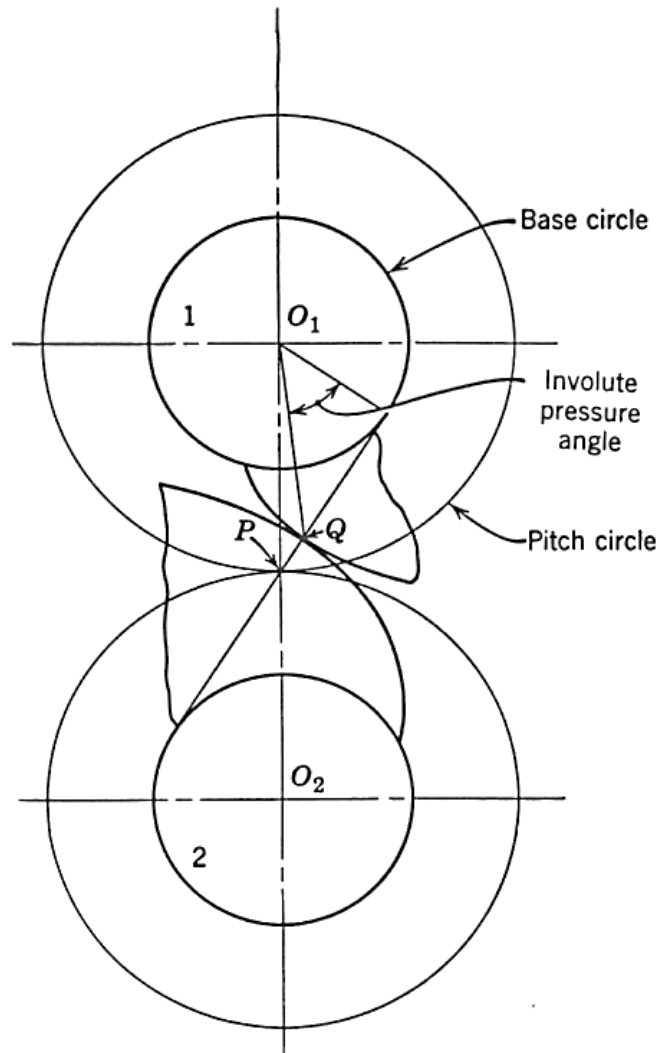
Base dimensions of a gear assembly (Mabie & Reinholtz, 1987, p. 131).
